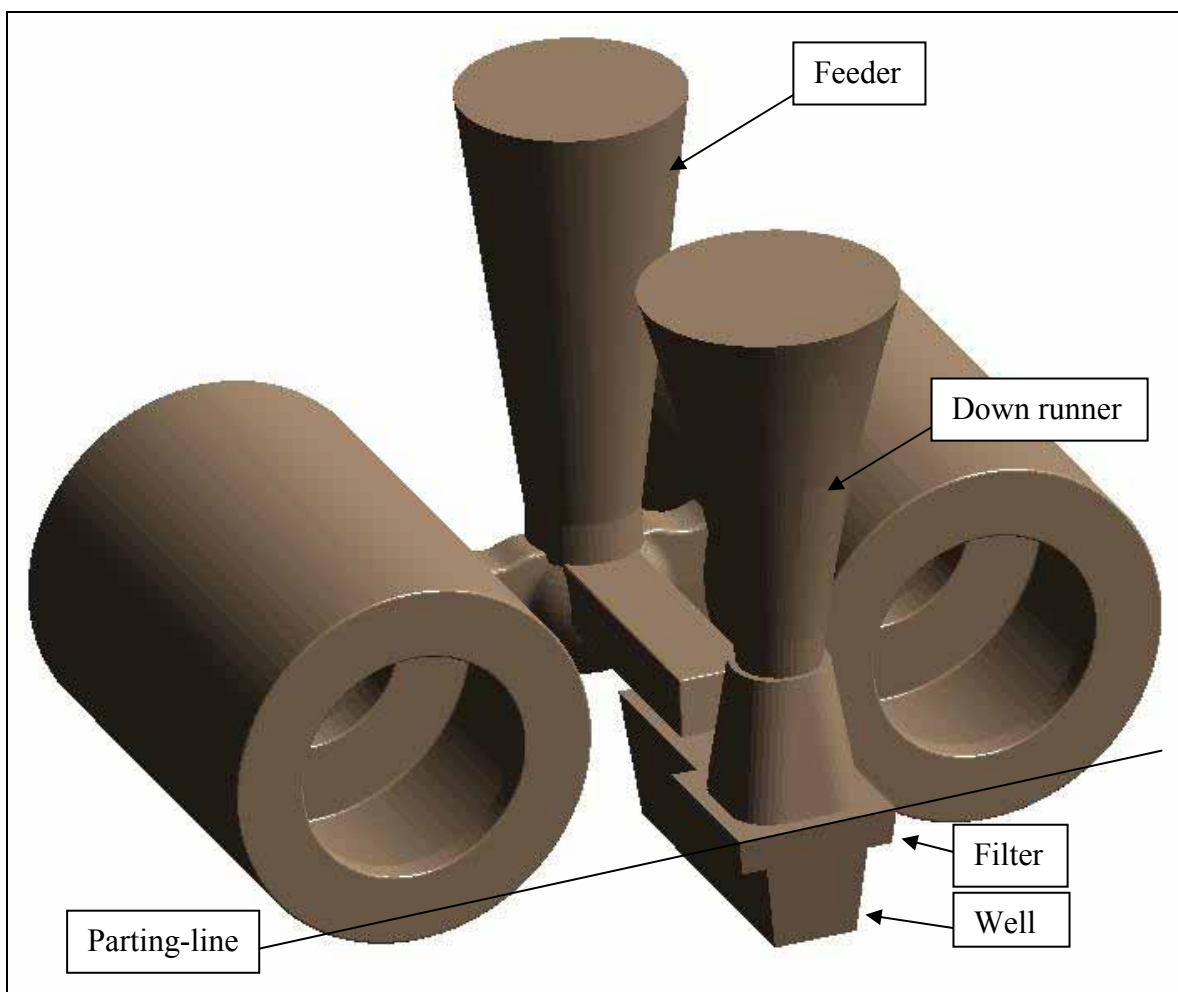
The traditional layout for two valve-housings cast in bronze.
